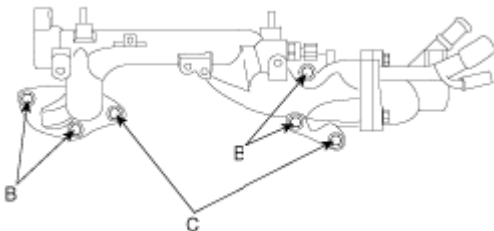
Identifying Mounting Bolts For Water Temperature Control Assembly
